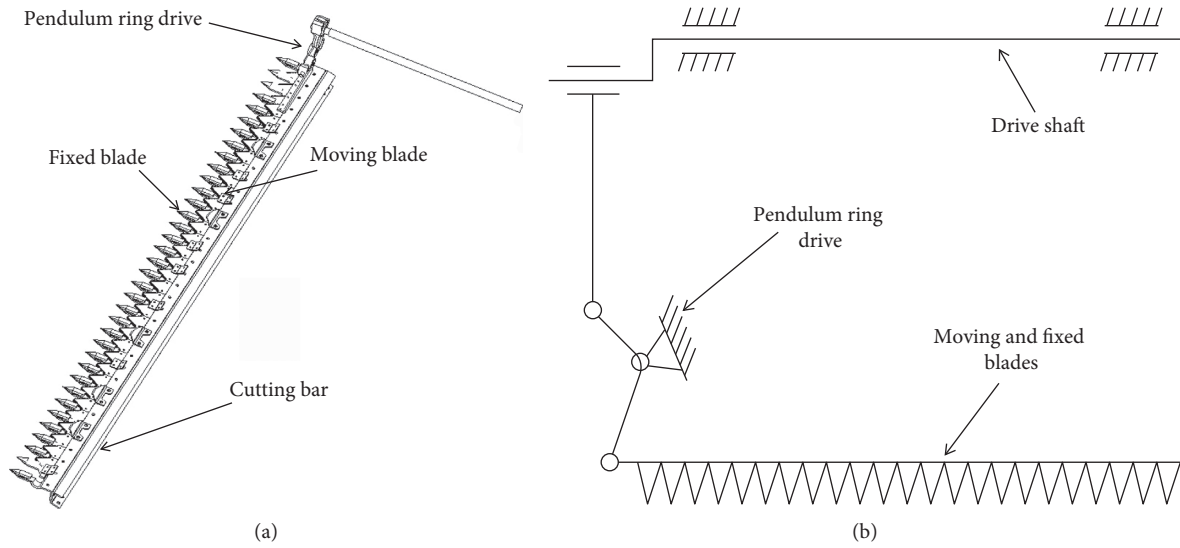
Structure and schematic of the cutting bar. (a) Assembly of the cutting bar. (b) Pendulum drive mechanism.
